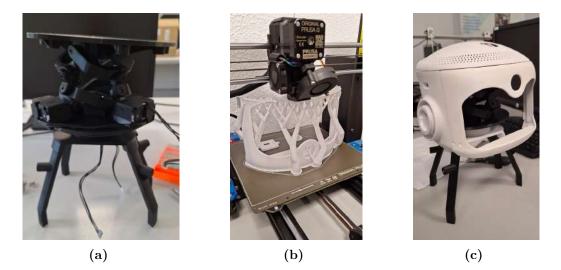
3D printed parts: (a) Support assembled with the neck mechanism, (b) Front panel during printing process, (c) Head external panels.
